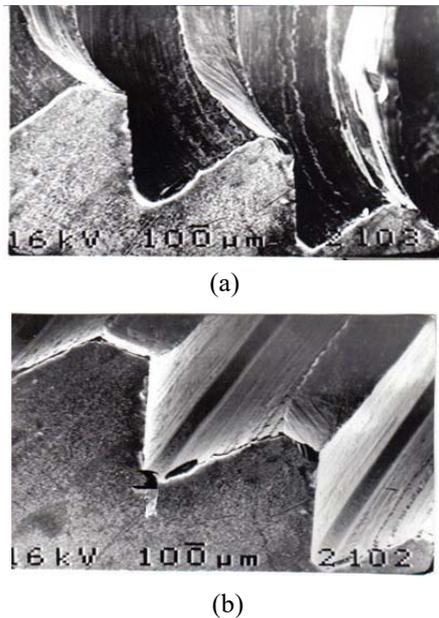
Thread profile formed by (a) classical and (b) ultrasound screw tap
